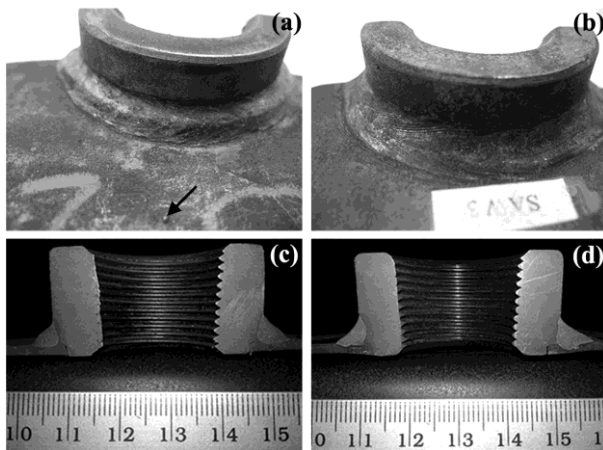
Bead appearances of (a) MAG-M (b) SAW welding samples, and cross-sections of fillet welding by (c) MAG-M (d) SAW.
